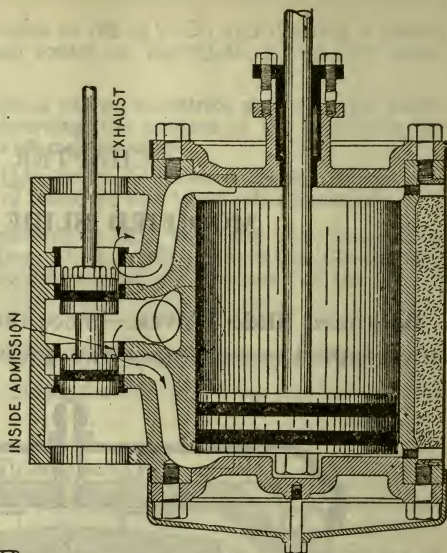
Inside admission piston valve. An advantage of this type valve is that the stuffing box is not exposed to the high pressure of the live steam, hence less trouble by leakage; a disadvantage is that, the steam edges of the valves and ports not being visible, the valve is less easily set, the reverse conditions hold for the outside admission valve shown in fig. 514.
